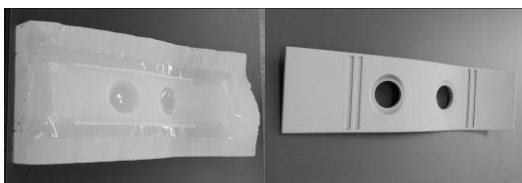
Half of silicone mold and final product made with Vacuum Casting
